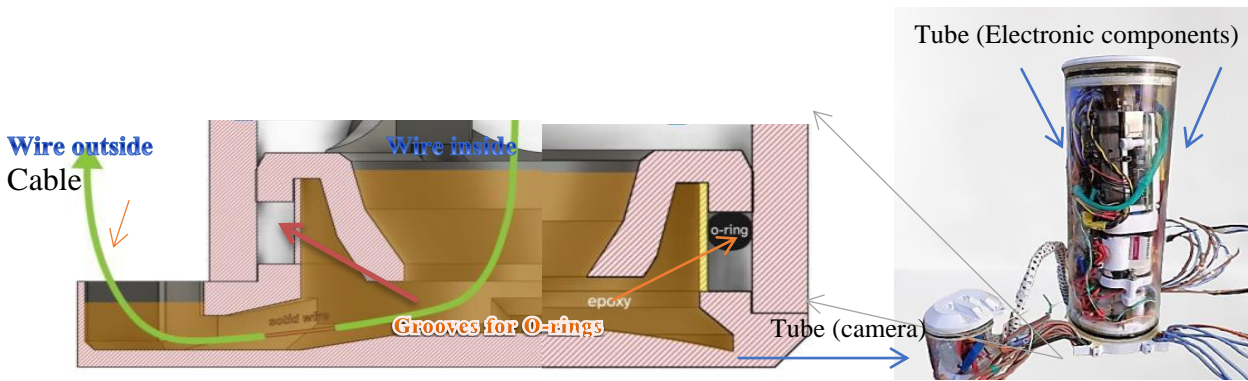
Cross-sectional view of the water sealing part, illustrating the sealing mechanisms at both ends of the assembled hull
